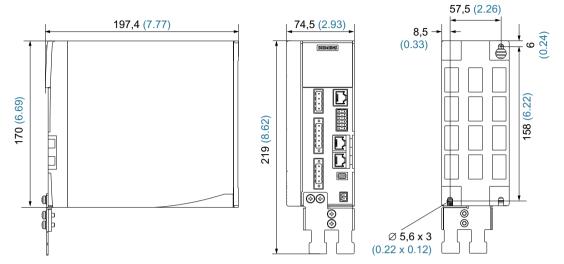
Dimension drawing SINAMICS S210 FSC, 1 AC, dimensions in mm (inch)
